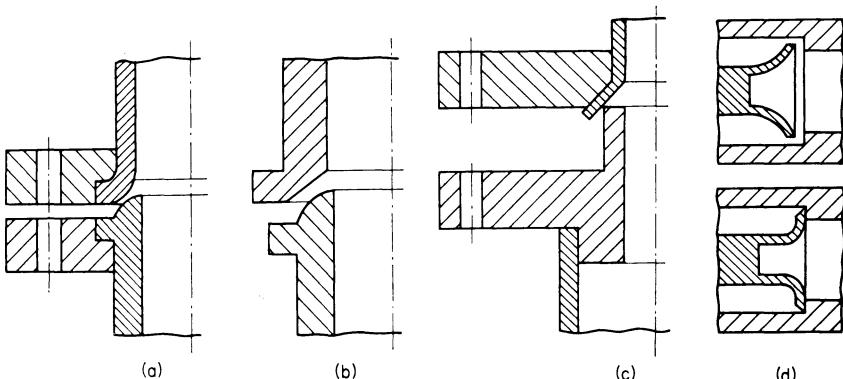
Conical seals without gaskets: (a) between convex and conical surfaces; (b) between two convex surfaces (after Hall⁵⁰³); (c) flare seal (after Lichtman⁷⁶⁴); (d) seal with conical spring washer (after Wishart¹³²⁷) (*Courtesy of Pergamon Press*)
